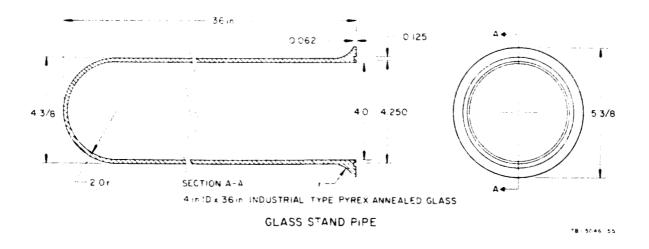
DIMENSIONS OF GLASS STAND PIPE FOR 8-MONTH-STORAGE TEST UNITS
